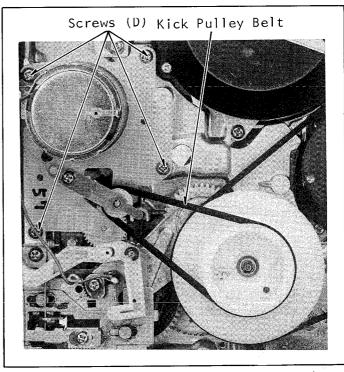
Adjustment of Cam Gear and Mode Select Switch - (10)
